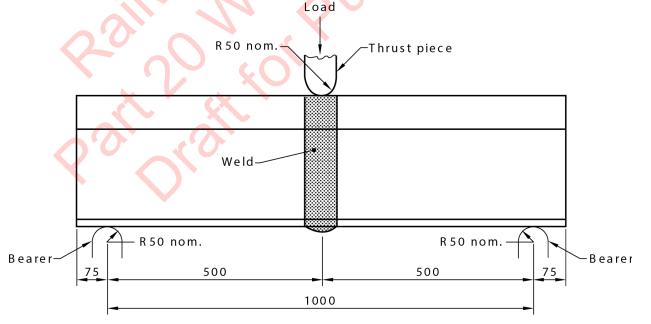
Typical testing assembly for slow bend test (dimensions in millimetres)
